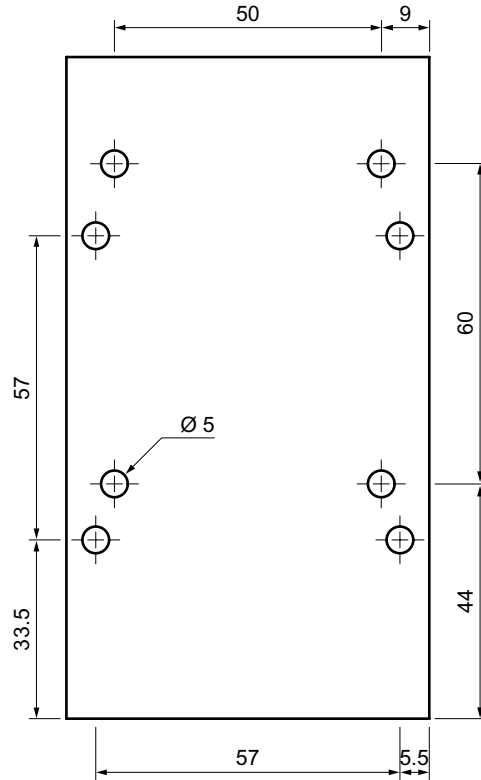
Drilling templates for mounting the SIMATIC MV500 optical reader
